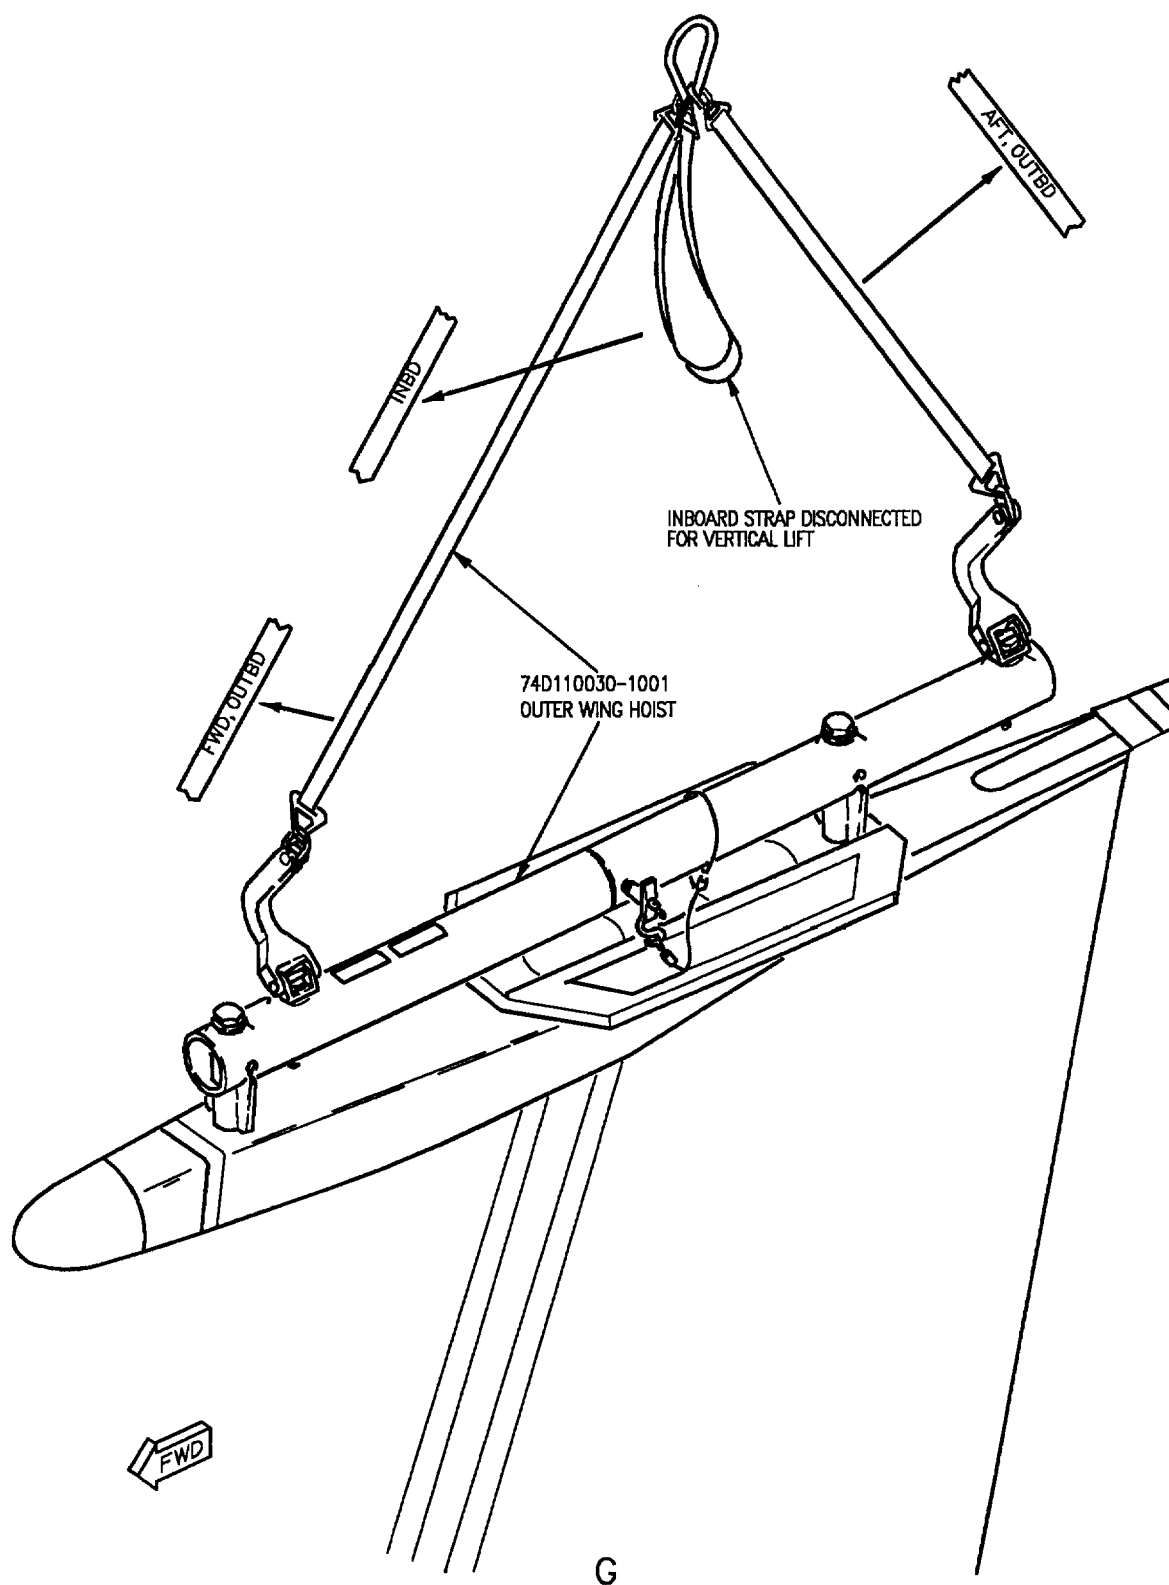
Installation of Outer Wing into Fixture (Sheet 6)
